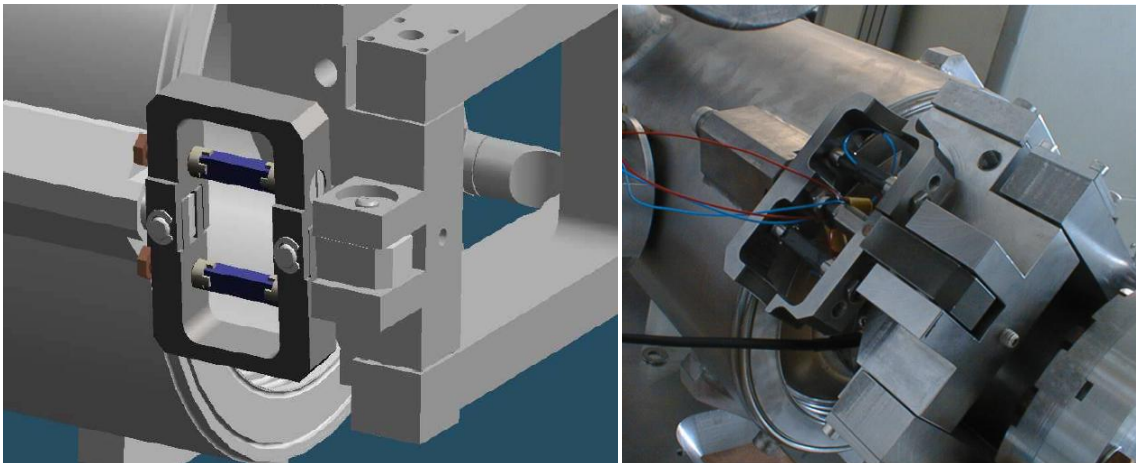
the piezo frame with 2 actuators installed in the TTF tuner, a CAD model (left) and the first prototype (right)
